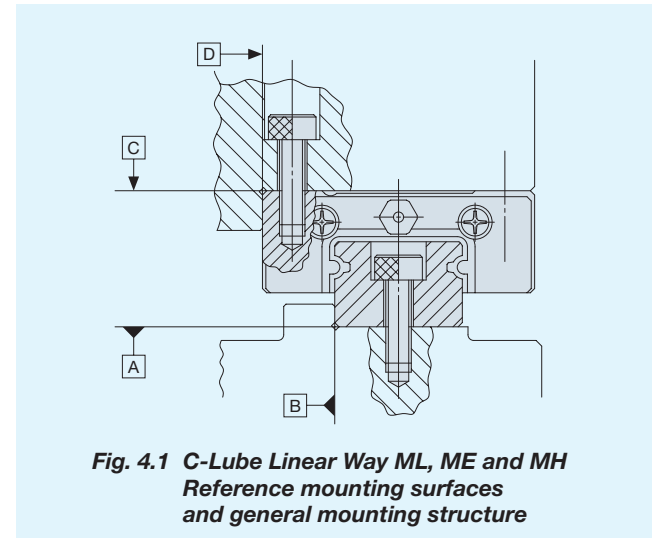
C-Lube Linear Way ML, ME and MH Reference mounting surfaces and general mounting structure
